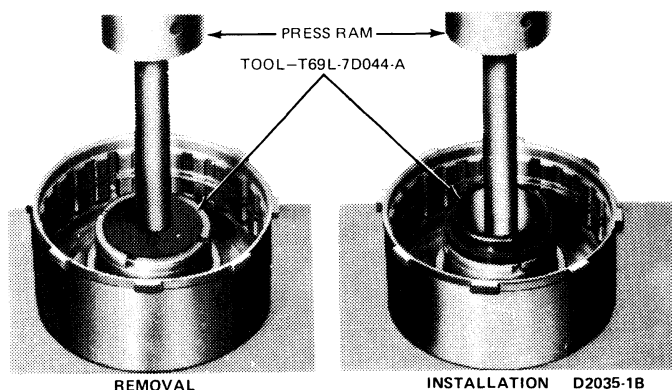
Replacing Reverse-High Clutch Rear Bushing
